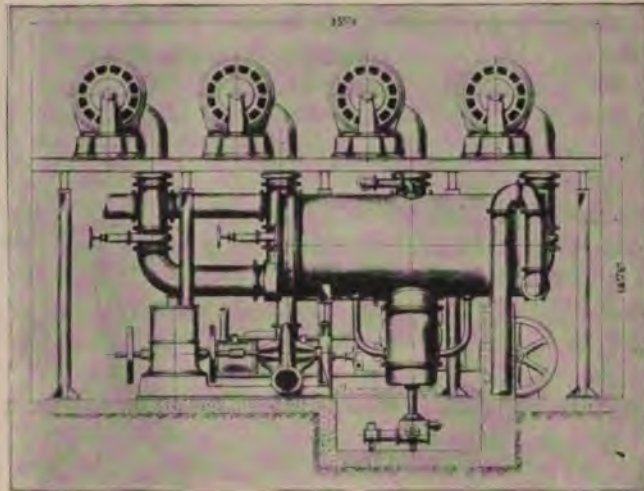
POWER-HOUSE CONTAINING FOUR 400-KW WESTINGHOUSE-PARSONS STEAM TURBINES AND CONDENSERS. END ELEVATION
